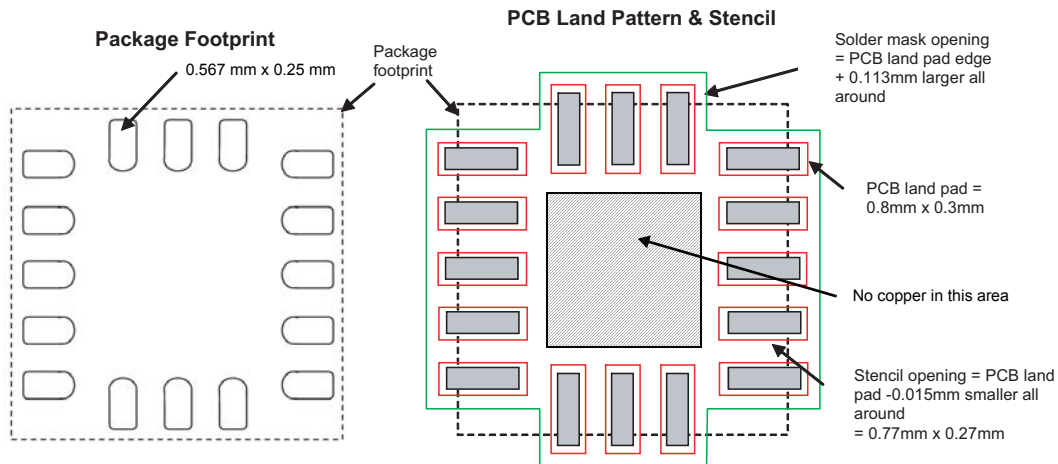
Recommended PCB land pattern, solder mask, and stencil opening near package footprint
